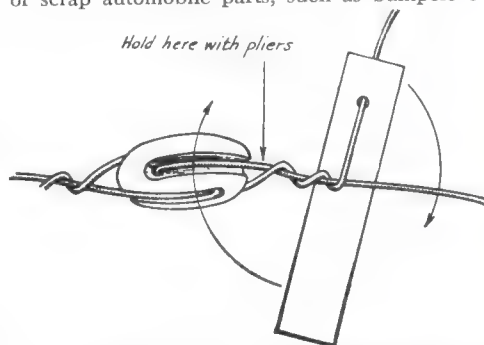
Simple lever for twisting solid guy wires in attaching strain insulators.
